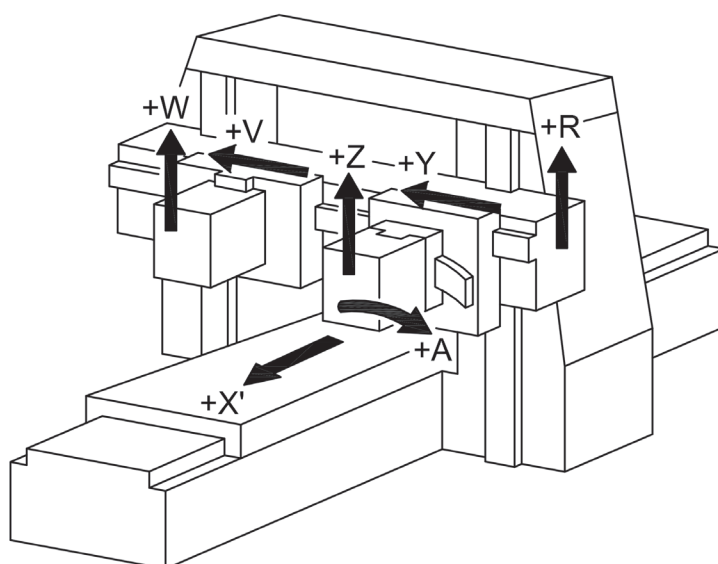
Example of a double column bed-type milling machine (portal milling machine)
